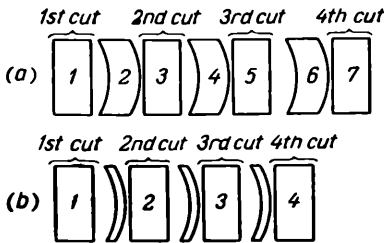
Strips cut with two torches (the sequence of strip cutting):
